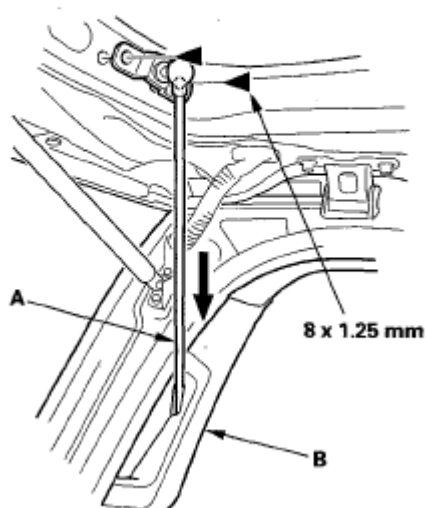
Identifying Power Tailgate Rod And Quarter Pillar Trim
